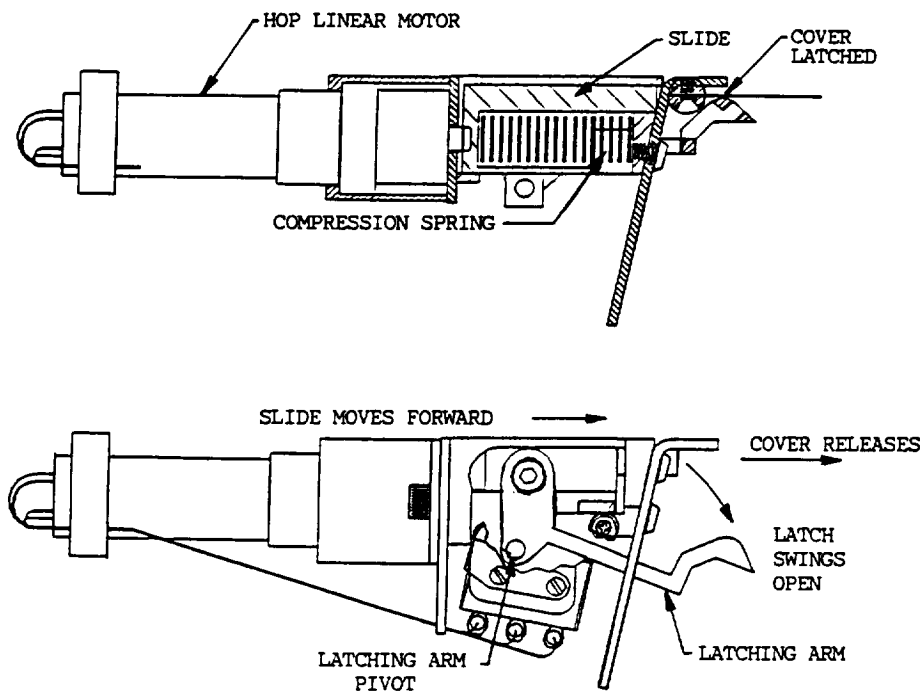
Latching mechanism; when the HOP motor is powered the latch opens.
